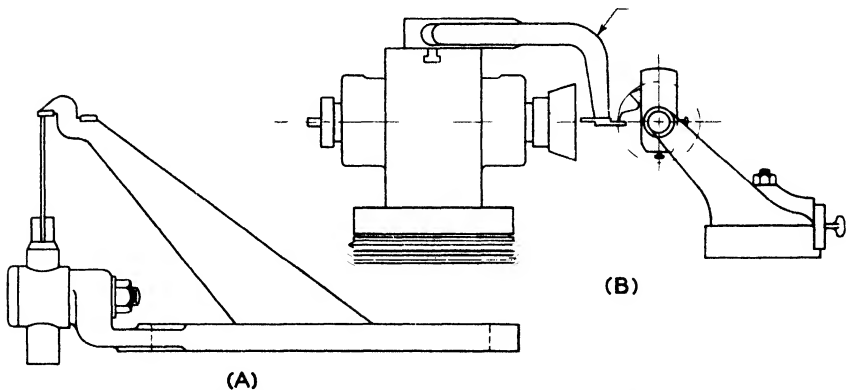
Tooth Rest Assembly (A), and a Centering Gage for Setting the Cutter in the Center of the Wheel Spindle (B)
